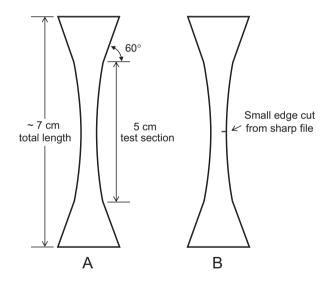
Acrylic test specimens, one with no flaw (A) and one with an edge cut (B).
